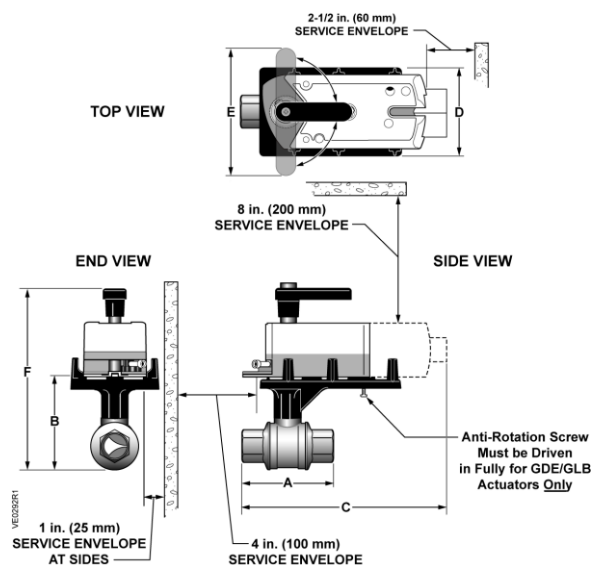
Two-Way Ball Valve and Low Profile Bracket with Actuator Dimensions in Inches (Millimeters).
